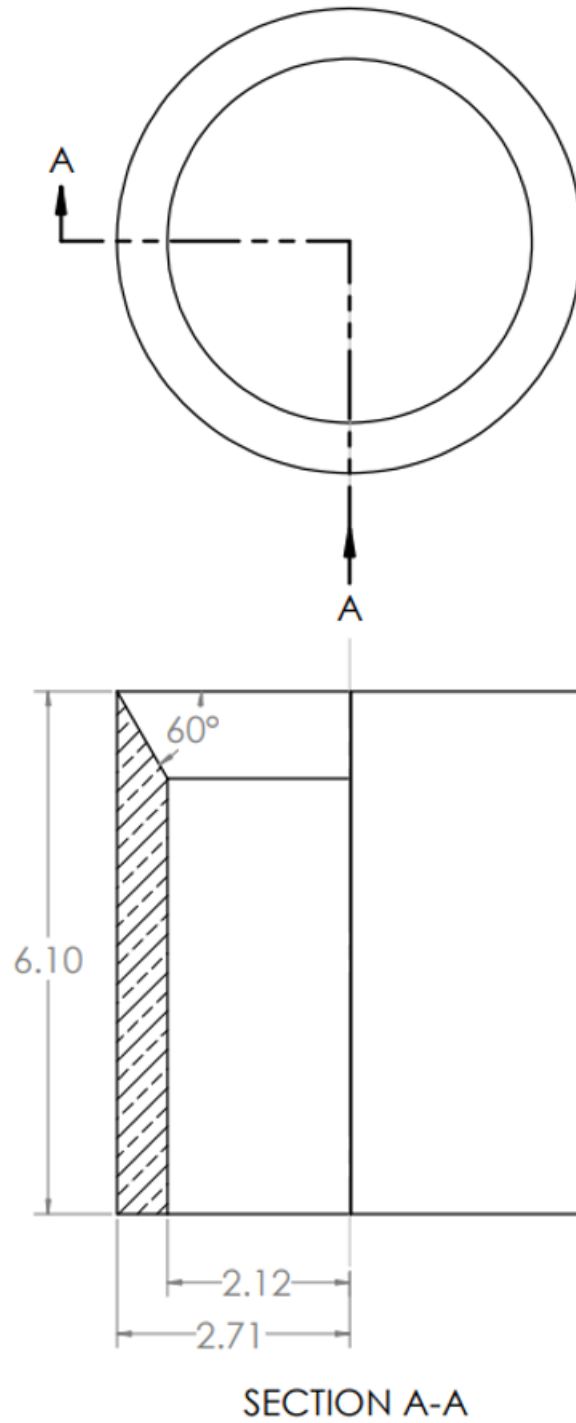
Dimensioned drawing of the coil used for the drop test experiment with lengths in units of centimeters.
